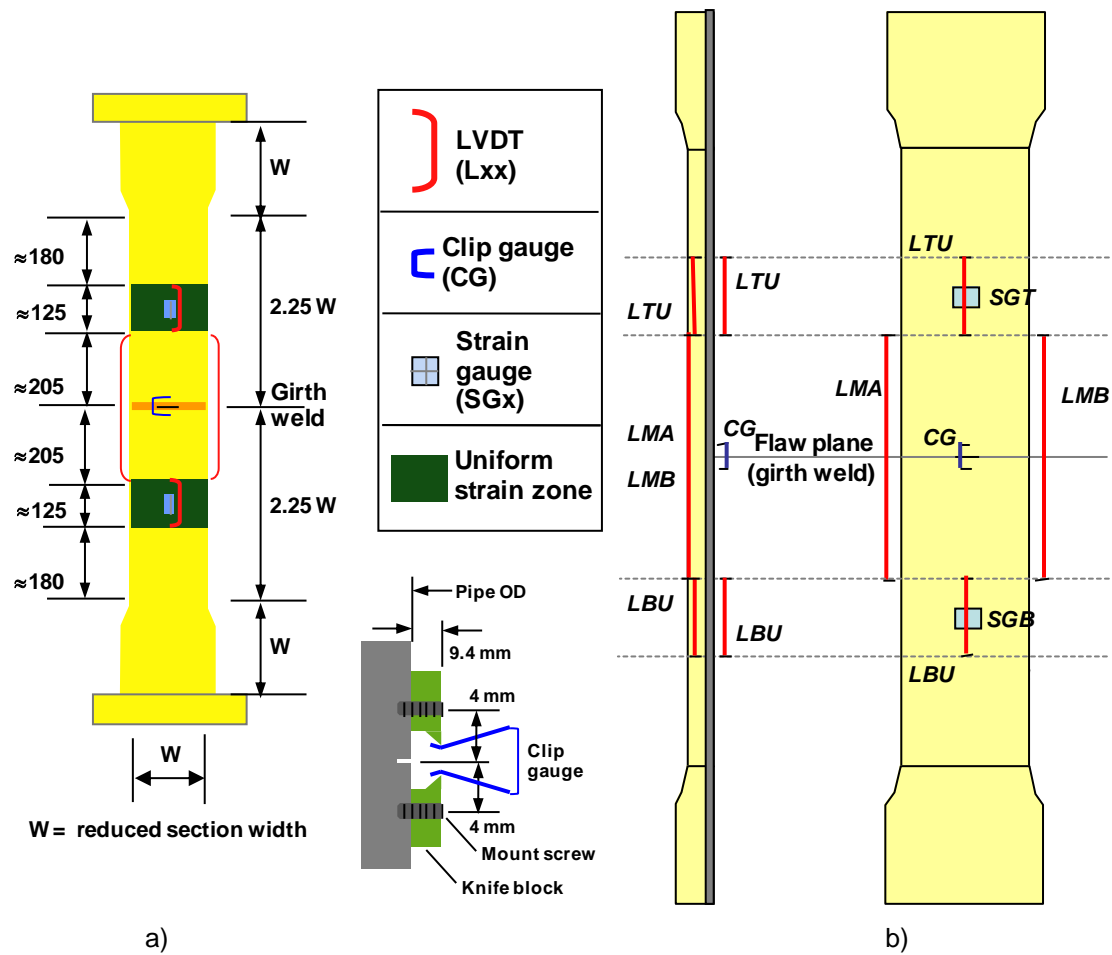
CWP Specimen Geometry and Instrumentation Layout – 12.75-inch Diameter Pipe
